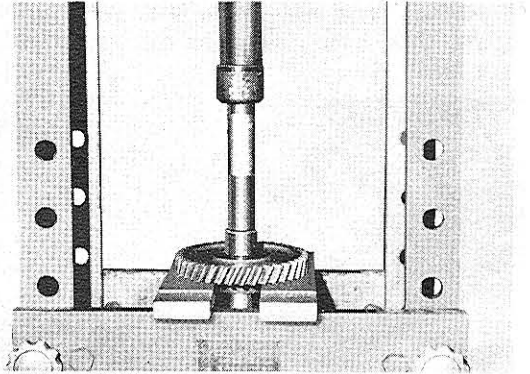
Counter Shaft V5072 Drive Gear Removal
